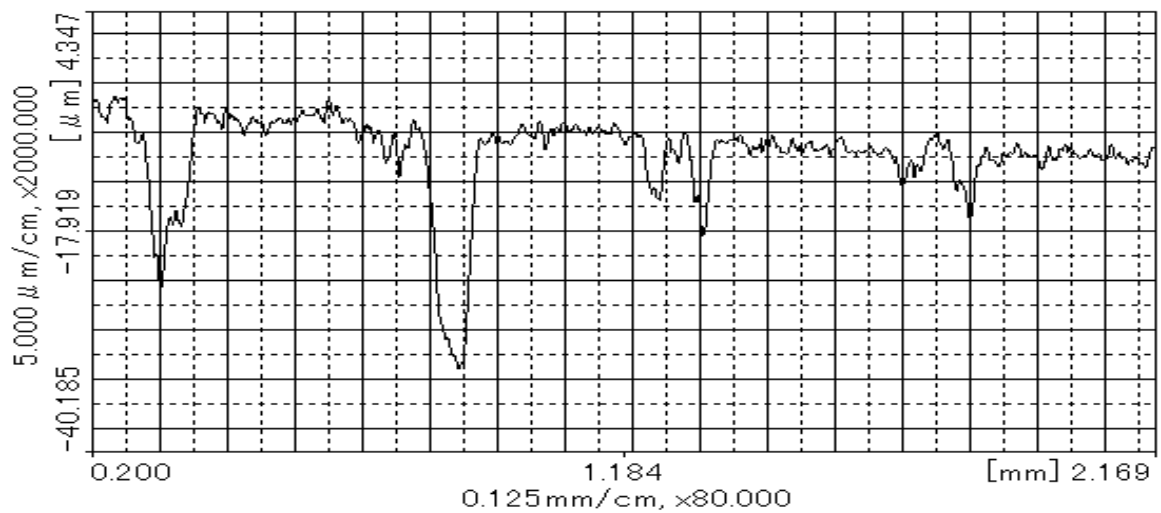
Finish surface parameter (machined with Tool No. 2 (Helix angle  $30^\circ$ )) (Down cut method)
